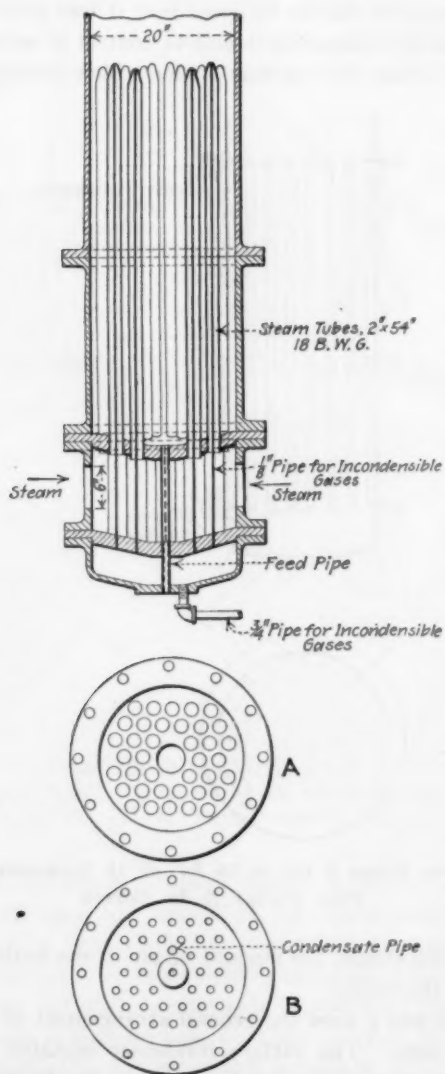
38 COPPER HEATING TUBES 2 IN. BY 54 IN. BY 18 BIRMINGHAM WIRE GAGE. TOTAL HEATING SURFACE 86.21 Sq. Ft.
